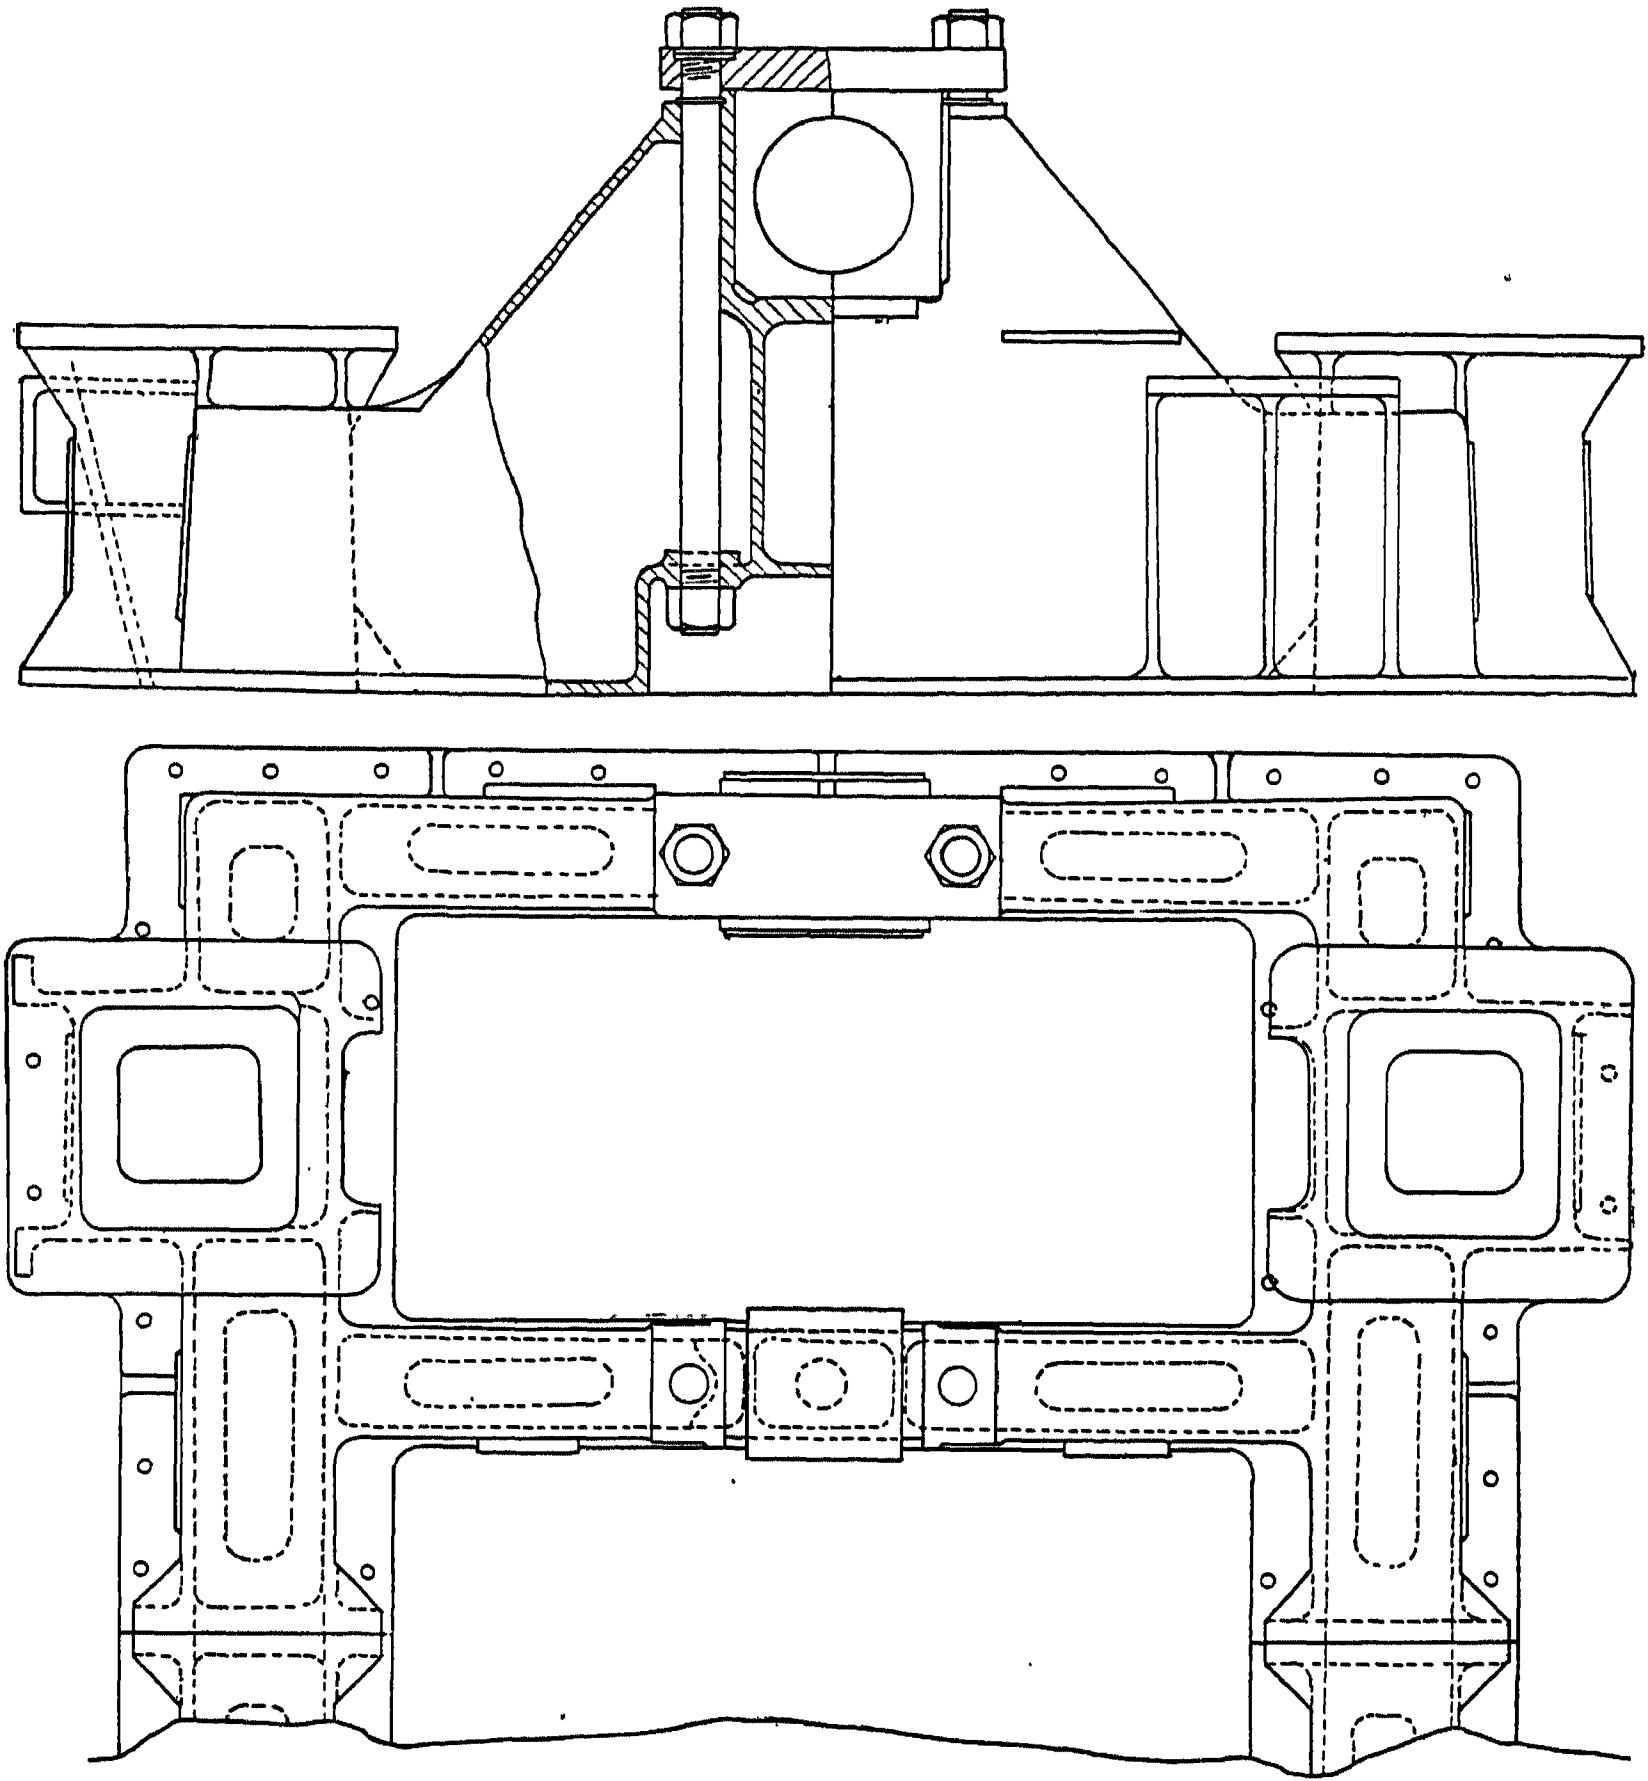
Marine-engine Bedplate showing Sectional View of Main Bearing
